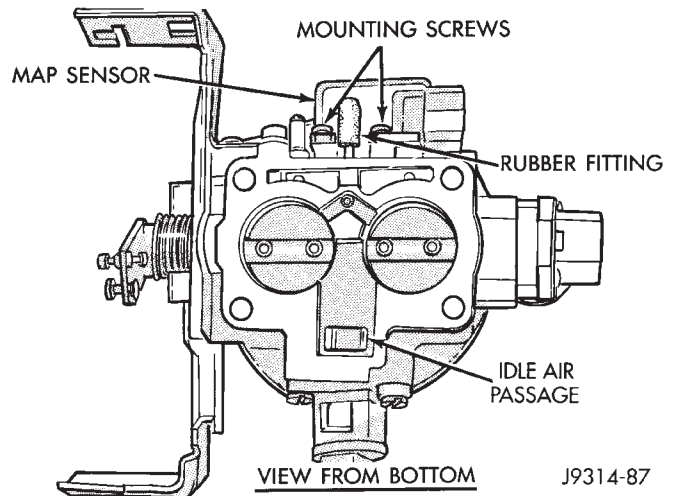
MAP Sensor Rubber Fitting—5.2L Engine
